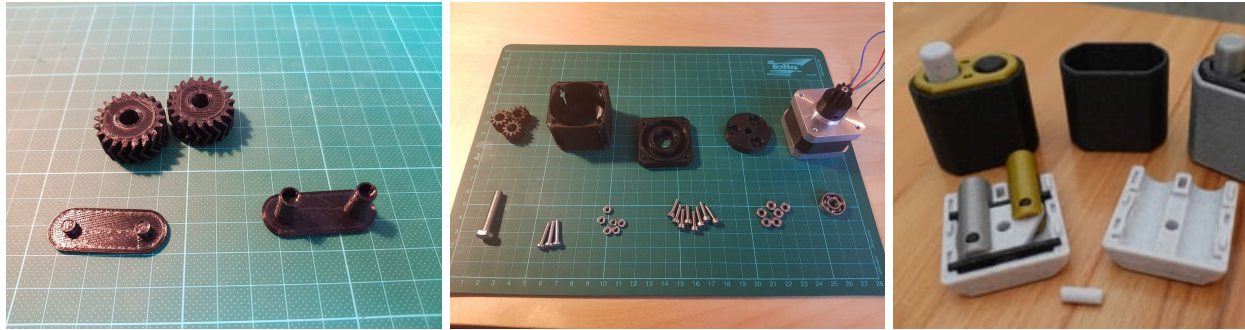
Parts needed for both assemblies. Left: Helical Gear. Middle: Planetary Reducer. Right: Figdet toggle toy
